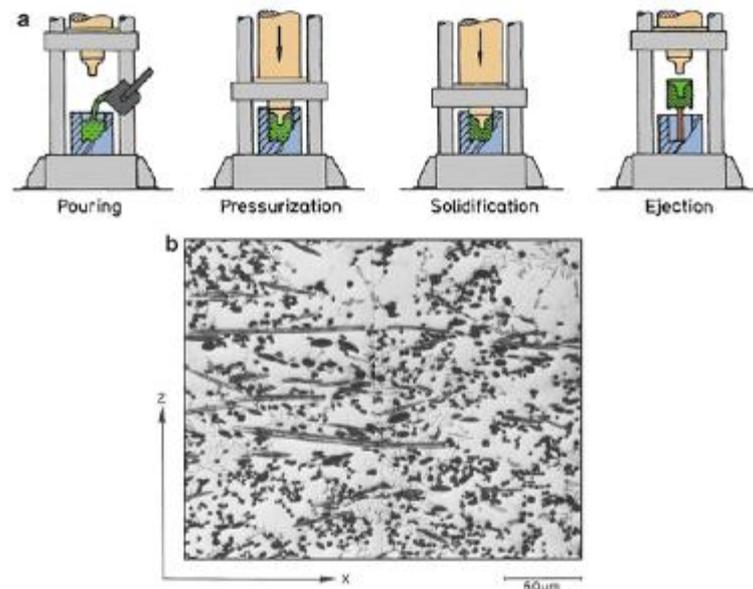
(a) Squeeze casting technique of making a metal matrix composite. (b) The microstructure of Saffil alumina fiber/aluminum matrix composite made by squeeze casting. [Courtesy of G. Eggeler]
